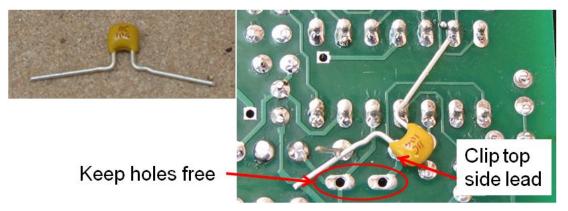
Lead shaping of bottom side 0.1 uF ("104") cap and "dry fit" mounting details
